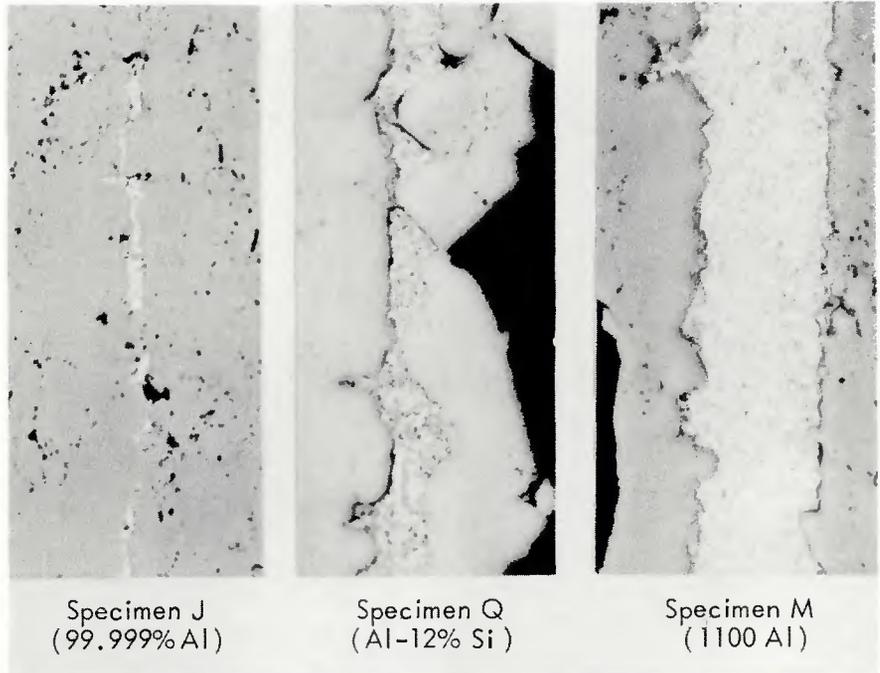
Sections through brazed joints after test in cases where fracture was not interface limited. X800, reduced 9%. Specimen J: strength, 21,000 psi; braze thickness, approx. 0.00008 in. Specimen Q: strength, 33,500 psi; braze thickness, approx. 0.00024 in. Specimen M: strength, 27,700 psi; braze thickness, approx. 0.0008 in.
